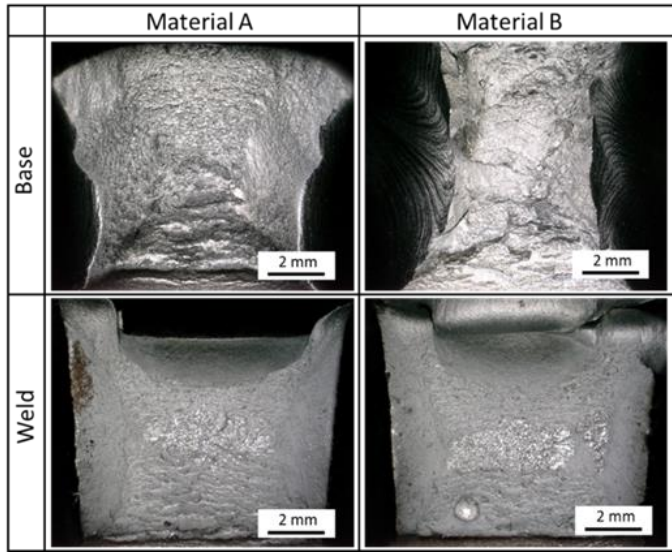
Fracture surfaces of Material A (left) and Material B (right) base (top) and weld (bottom) Charpy specimens tested at room temperature (~ 20.9 °C).
